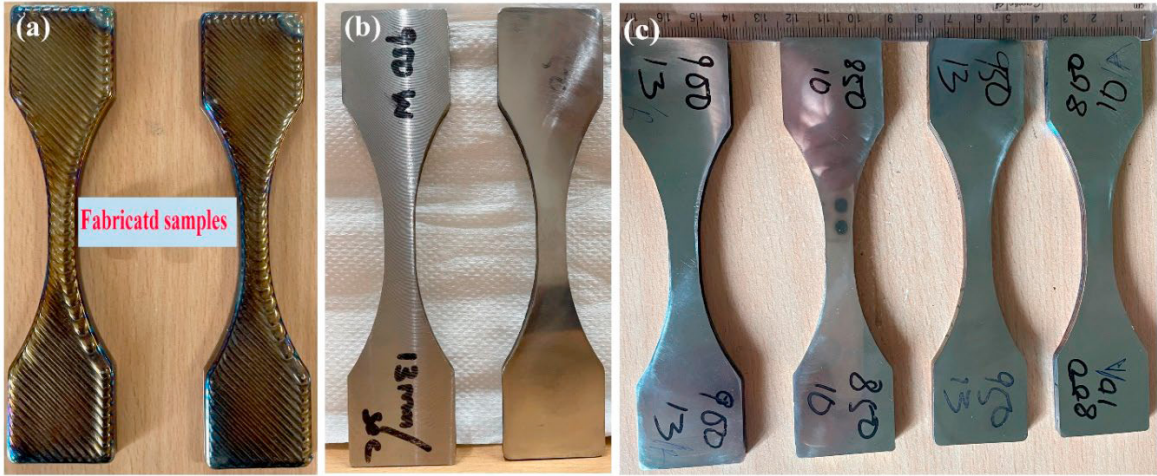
(a) Fabricated fatigue samples (b) machined samples and (c) polished fatigue samples.
